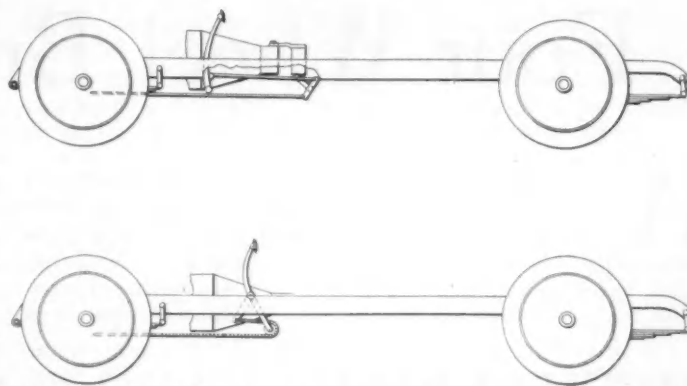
TYPICAL LAYOUT ILLUSTRATING THE CONNECTION BETWEEN THE TRANSMISSION AND THE FRONT-WHEEL BRAKES
